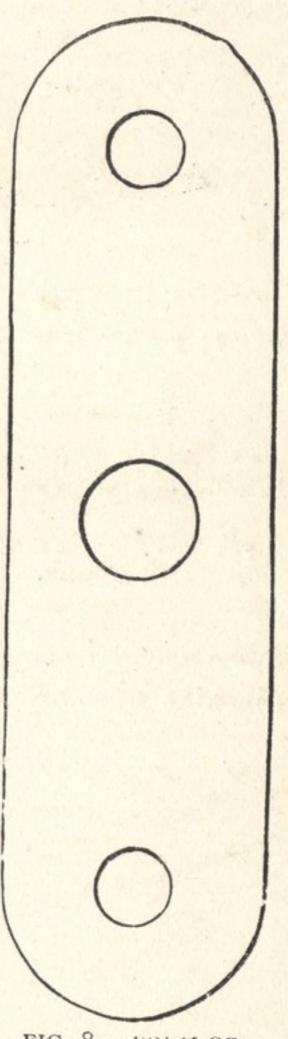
FORM OF WROUGHT-IRON CORE. HOLDER.
